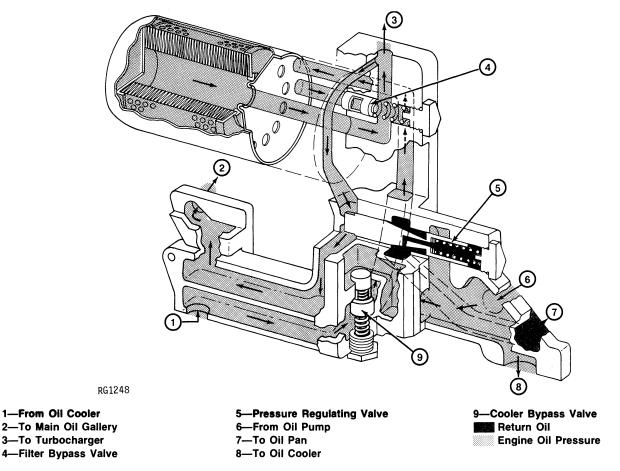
Oil Pressure Regulating Valve Housing Flow
